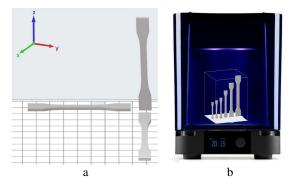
Arrangement: a. on the build-platform, b. inside curing machine and representation of different scaling dimensions
